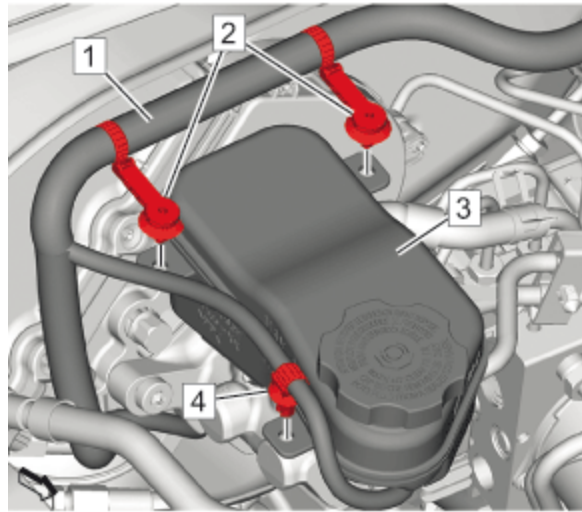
Brake Master Cylinder Reservoir And Body Wiring Harness
